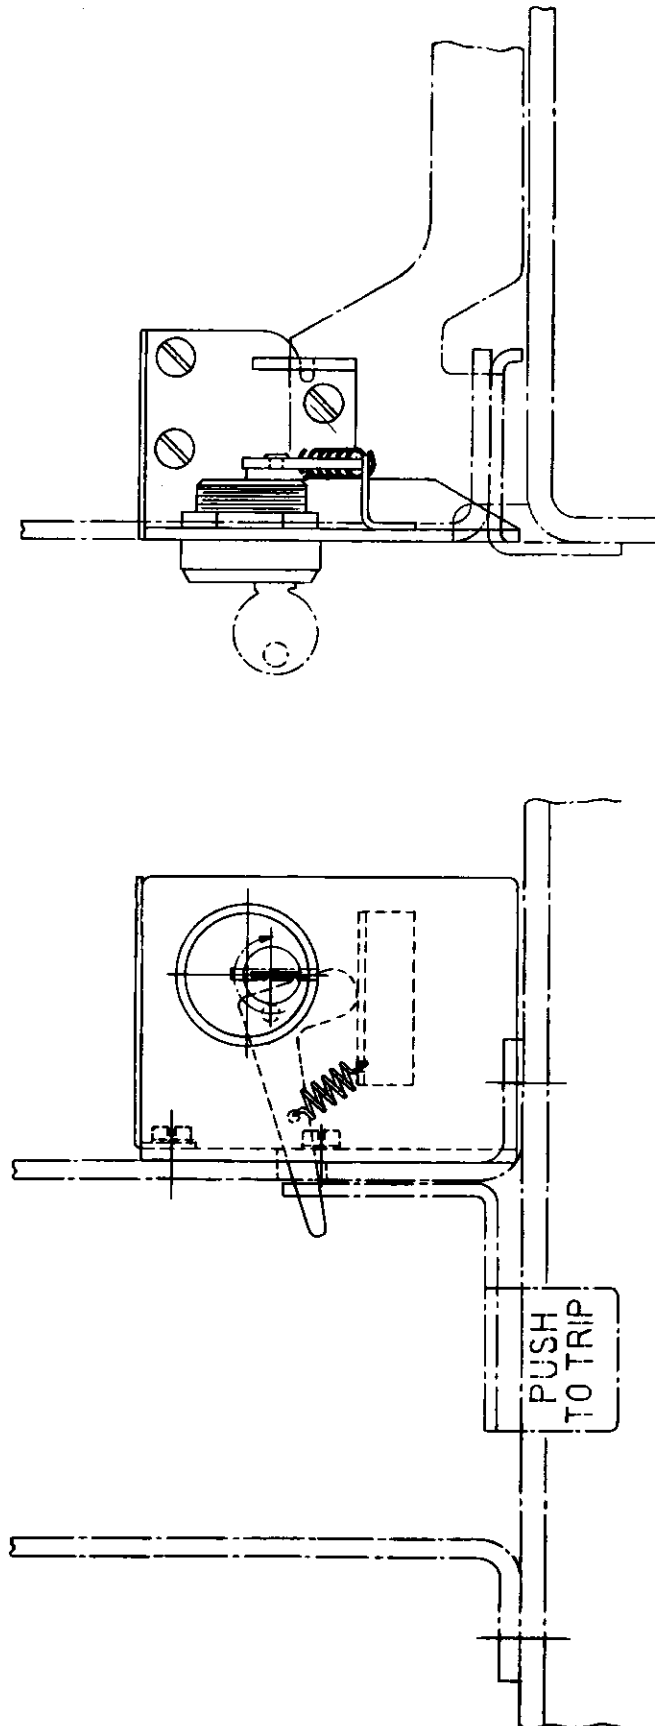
KEY LOCK OR KEY INTERLOCK ATTACHMENT - CONSTRUCTION DETAILS
